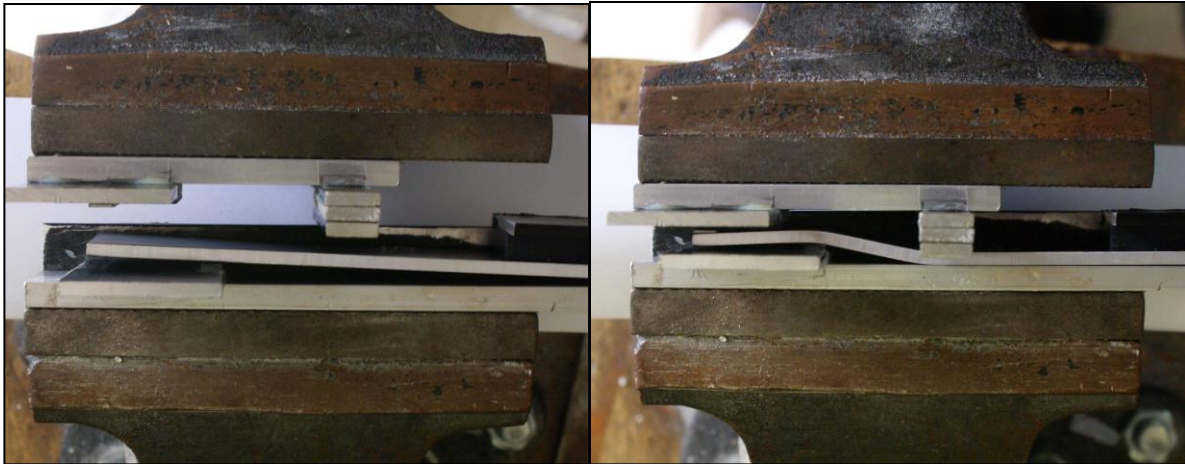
Single-lap shear adherend in bending jig a) before bending and b) during bending.
